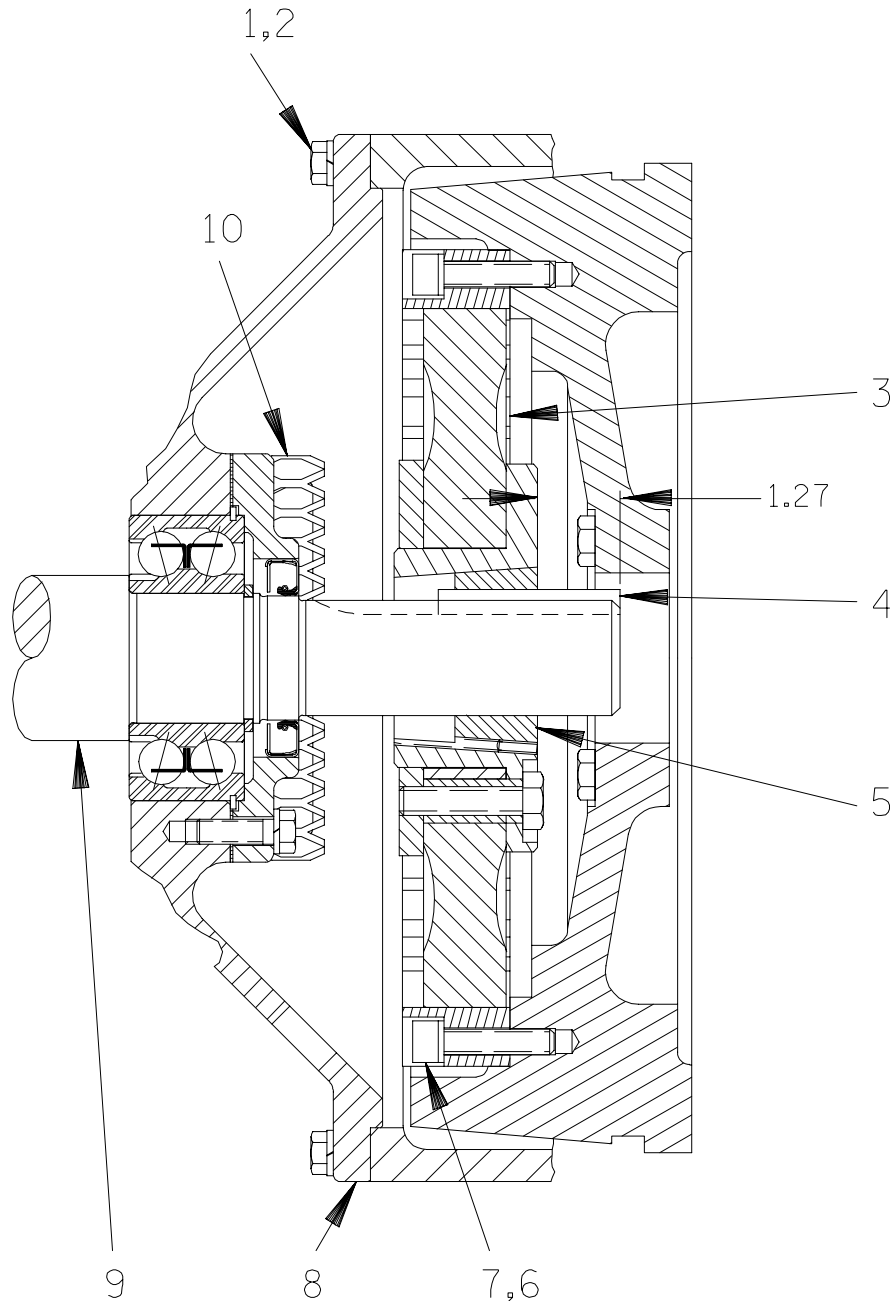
Drive Assembly For T6A3-F4L-SPA
